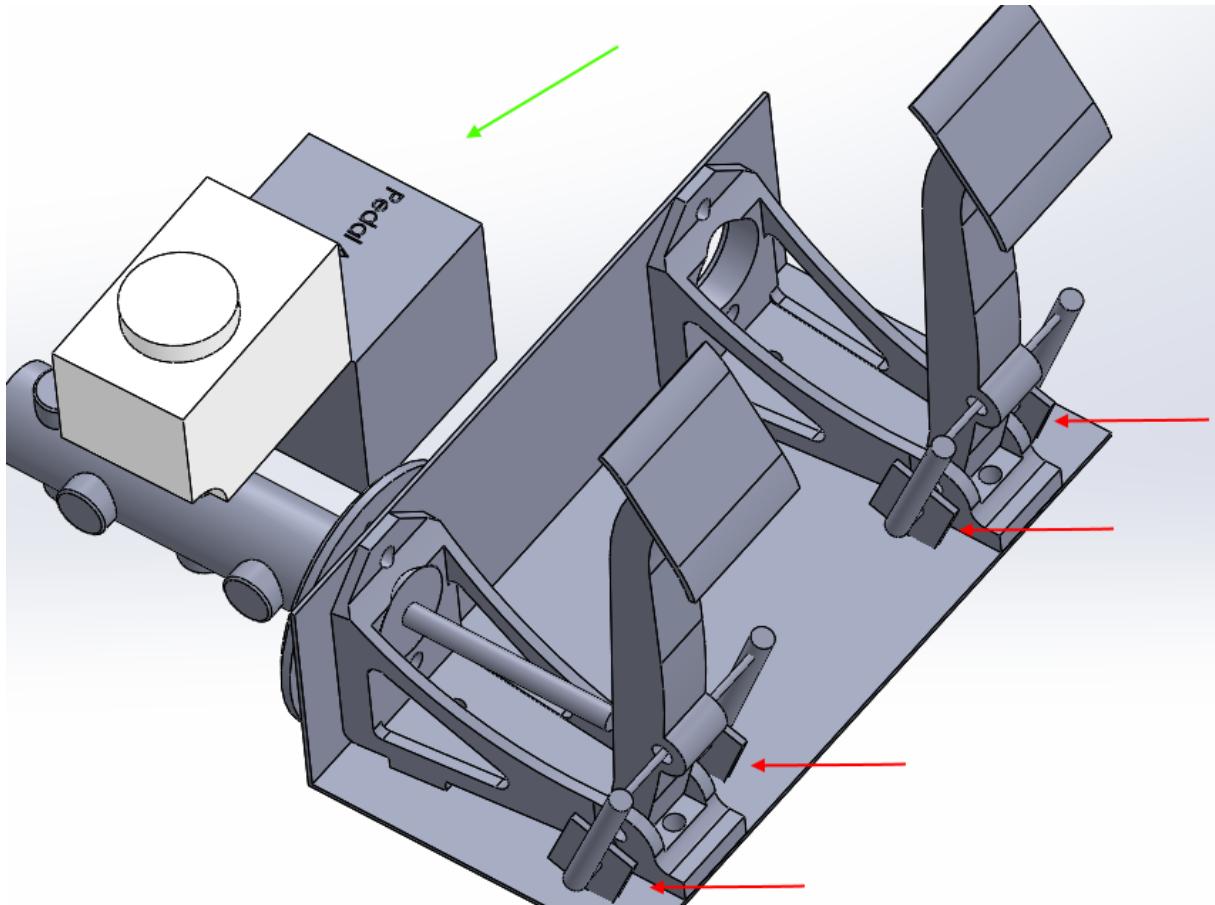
Driver input system mechanical design. Green arrow: Circuit enclosure. Red arrows: Sensor mounting
